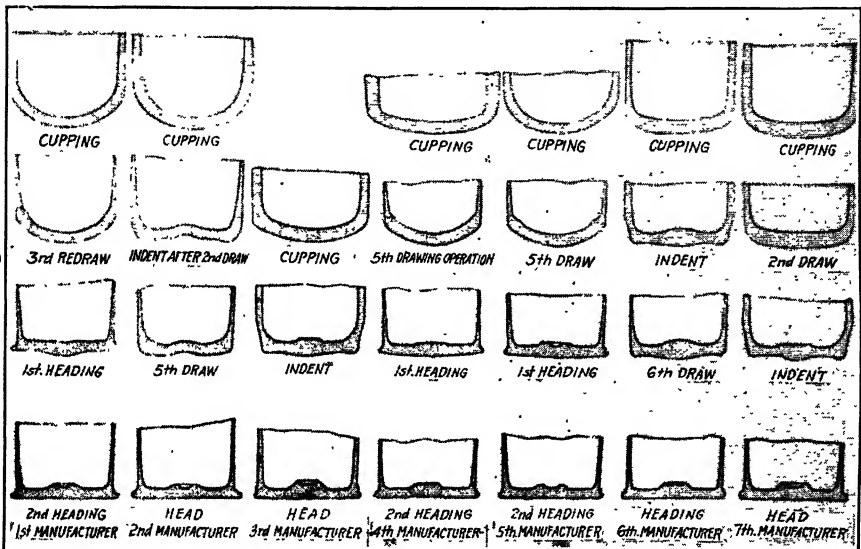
METHODS OF WORKING HEAD METAL DURING DRAWING AND IN FINAL HEADING OPERATIONS.
